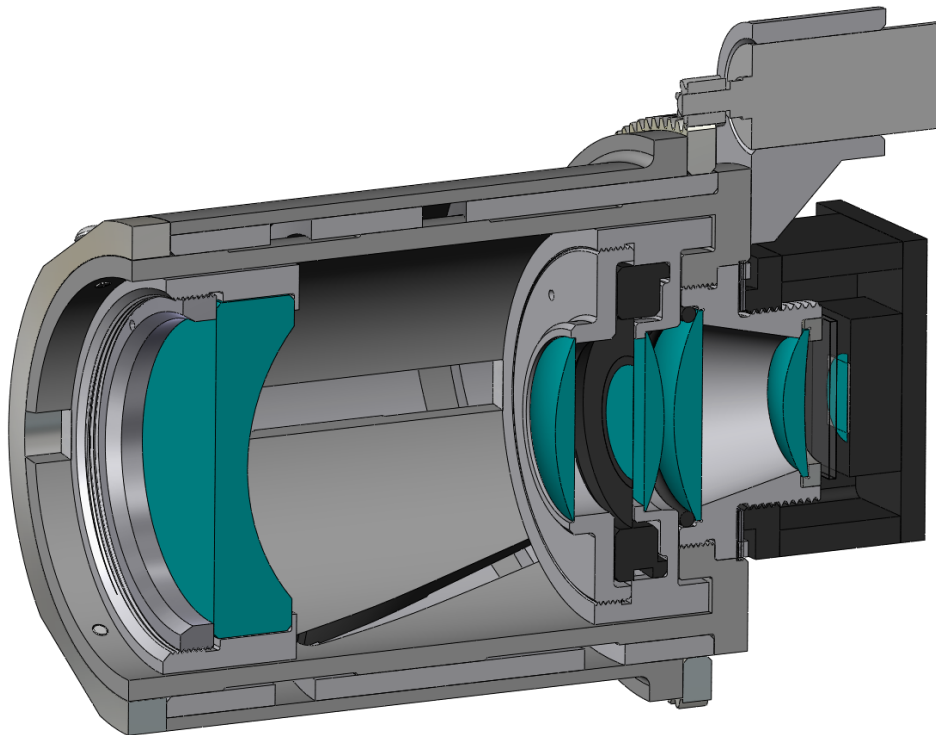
Cross section view of fully assembled prototype 3.4 in the zoomed out position.
